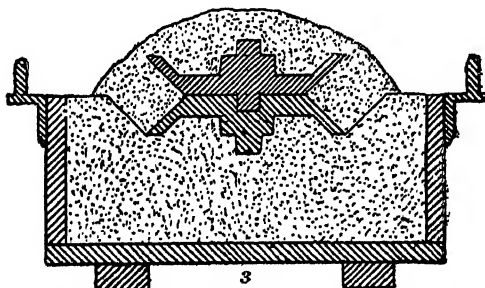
MOLDING A RING OF SAND IN THE GROOVE.
